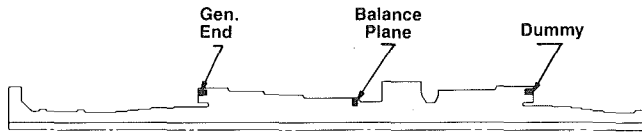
Schematic of a HP rotor forging showing test sample locations
